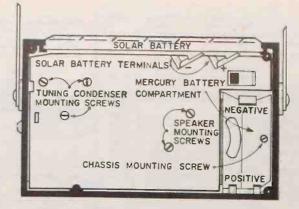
FIG. I- FRONT VIEW - DIAL PLATE REMOVED
